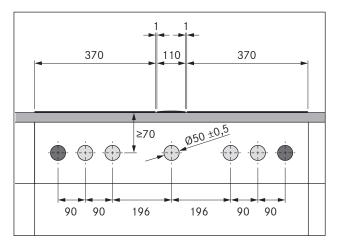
Bore holes for 2 cooktops and 1 extractor
